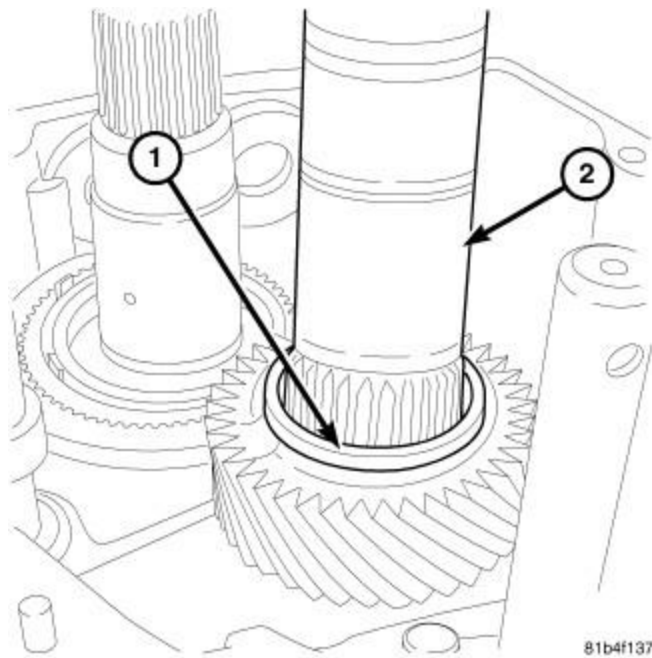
5th Gear Retainer Ring & Mainshaft
